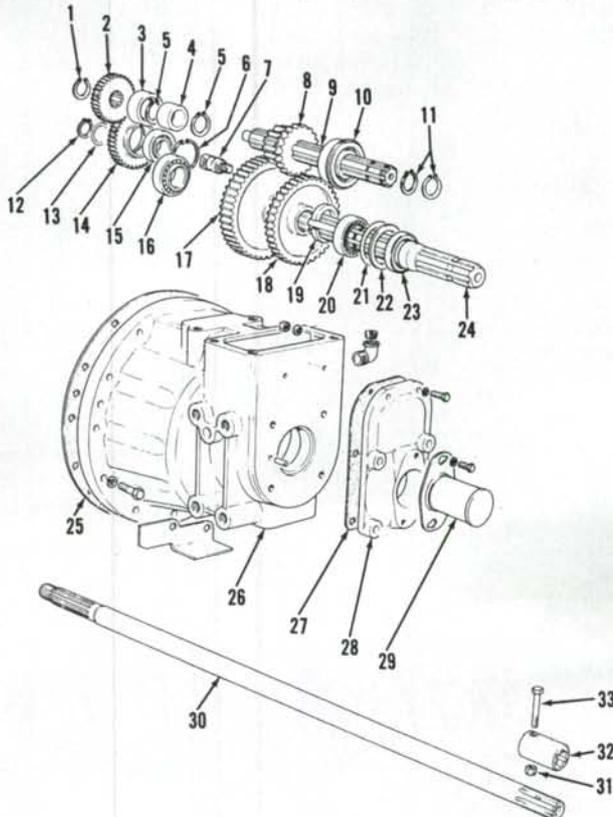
Exploded view of multispeed pto assembly used on some Models 1190, 1194, 1290 and 1294. Pto unit is identical to single speed pto (Fig. 228) except for speed change gear (8) and high range output gear (17).
